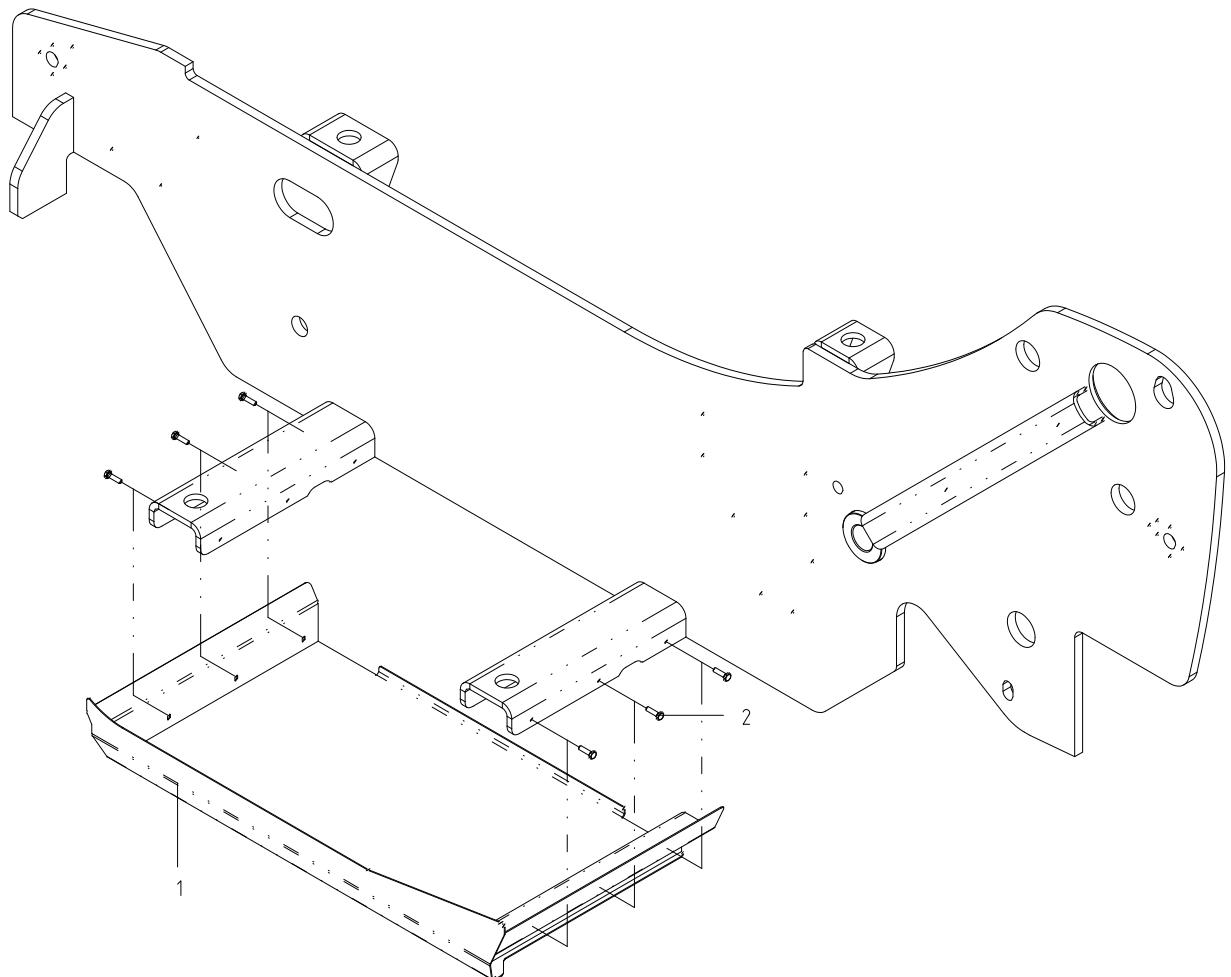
Lower cab cover assembly (T25-60XHYG)
